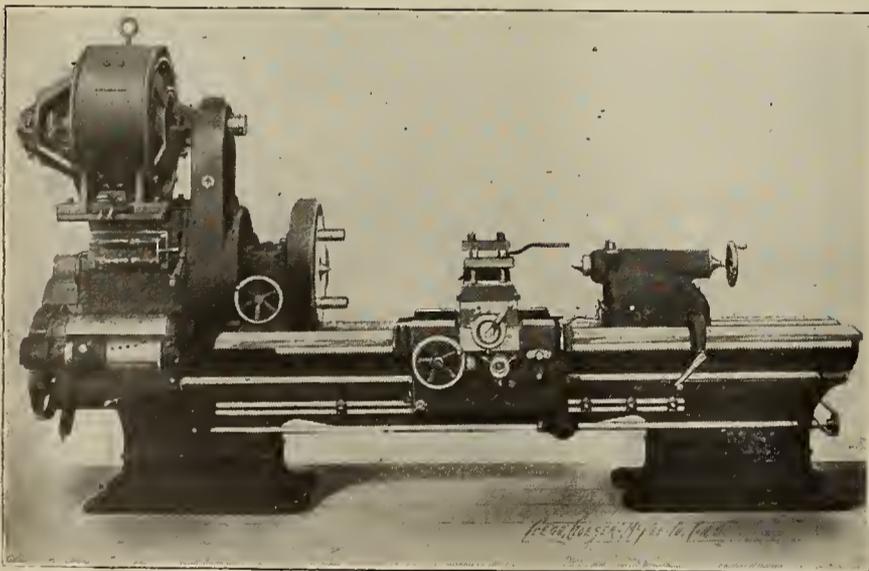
24-INCH HIGH SPEED ENGINE LATHE.
